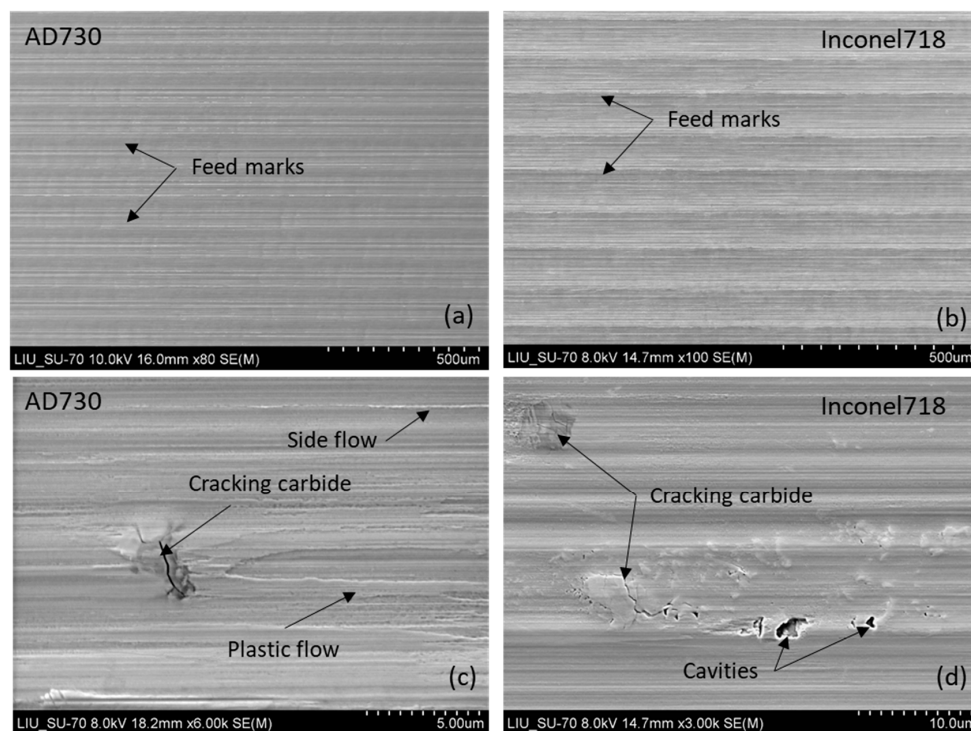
Surface morphology of AD730® and IN718 after machining; (a,b) Overview of machined surface with feed marks; (c,d) surface defects.
